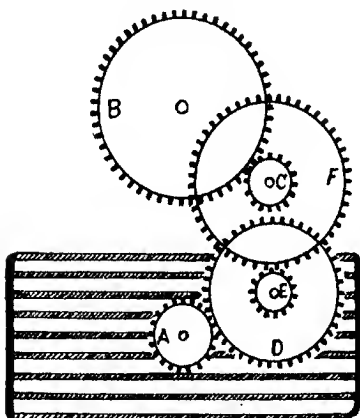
Gearing for Cross-over Slash Work Handkerchief or garment rollers—A, 60-tooth wheel on guide screw; B, 360-tooth wheel on roller mandrel; C, 25-tooth wheel geared into 360; D, 180-tooth wheel geared into 60; E, 20-tooth wheel geared into 240; F, 240-tooth wheel geared into 20
